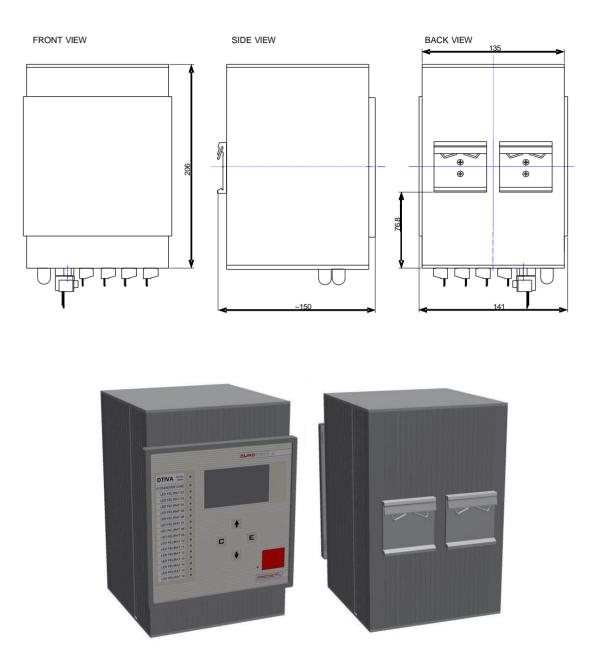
Dimensions for din rail mounting of 24 HP panel instrument case
